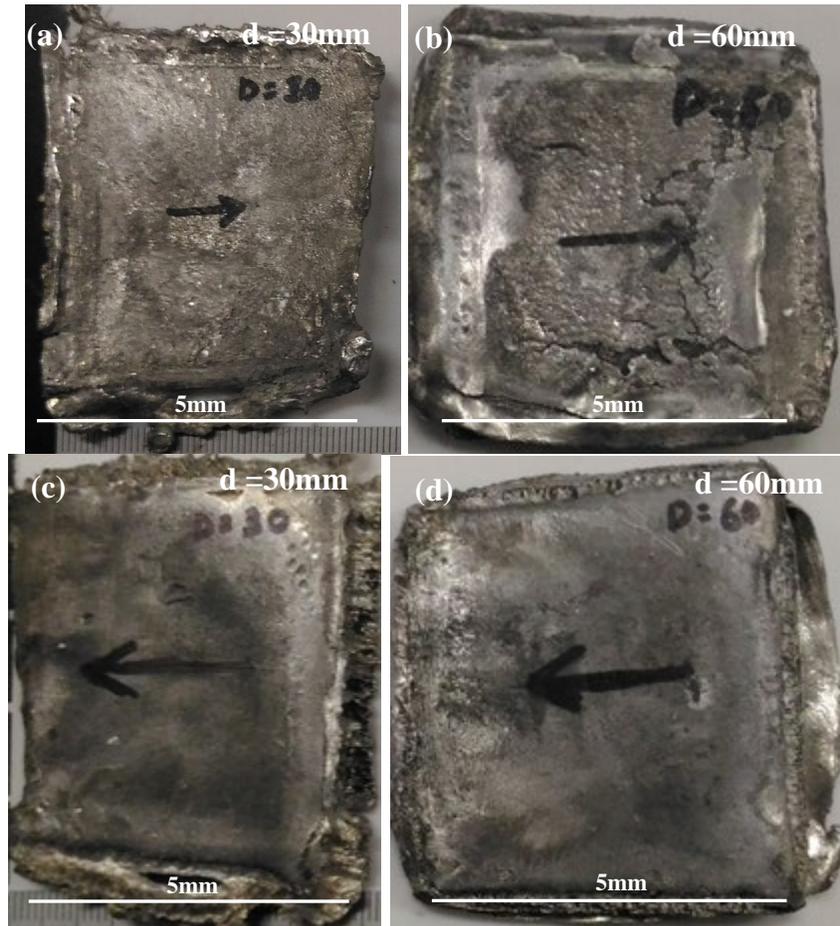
Explosive welded (underwater) Sn/Alu samples at (a) $d=30\text{mm}$ front view (c) $d=30\text{mm}$ back view (b) $d=60\text{mm}$ front view (d) $d=60\text{mm}$ back view
